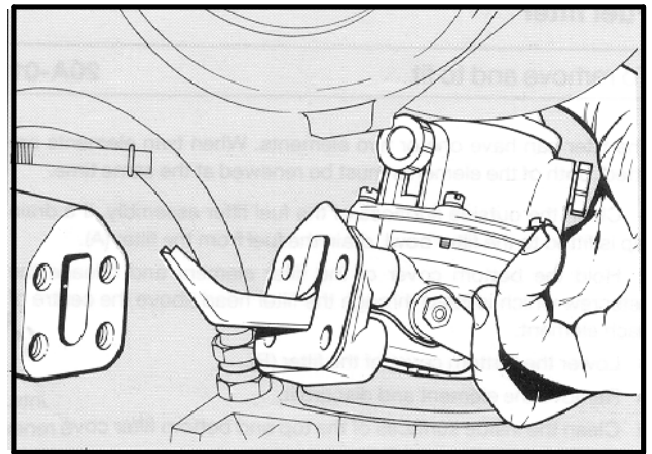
FUEL PUMP, REMOVAL AND INSTALLATION
